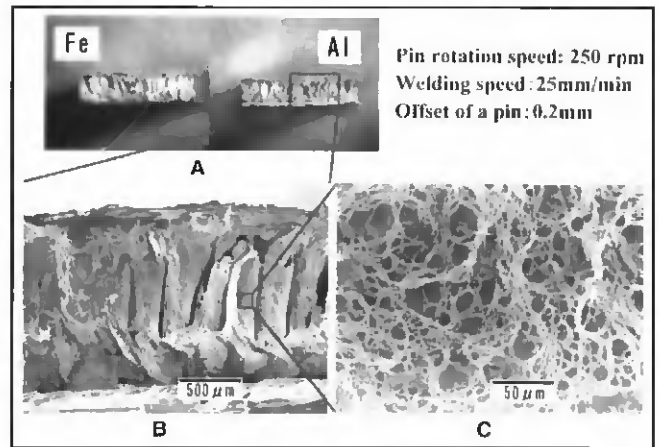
Fracture surface of the weld made under the optimal welding conditions: A — macrophoto of fracture surface; B — SEM image of fracture surface; C — enlarged SEM image of B. Fracture seems to occur along the interface between the steel fragments and the aluminum matrix, and a dimple pattern is observed in the fracture surface.
